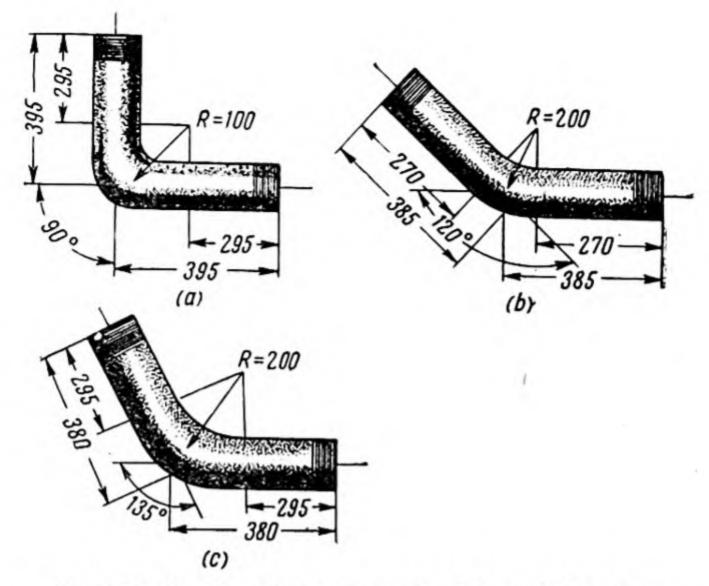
Standard bent elbows for 1/2" and 3/4" pipes: a-90° elbow, length of blank 780 mm; b-135° elbow, length of blank 750 mm; c-120° elbow, length of blank 750 mm.
